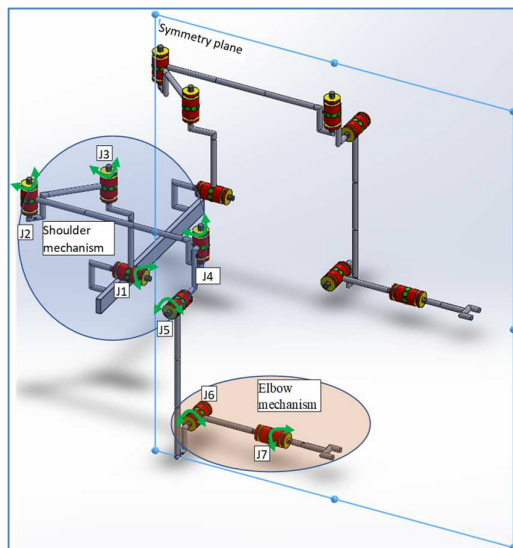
Schematic view of the CardioVR-ReTone exoskeleton - shoulder mechanism combined with the elbow mechanism.
